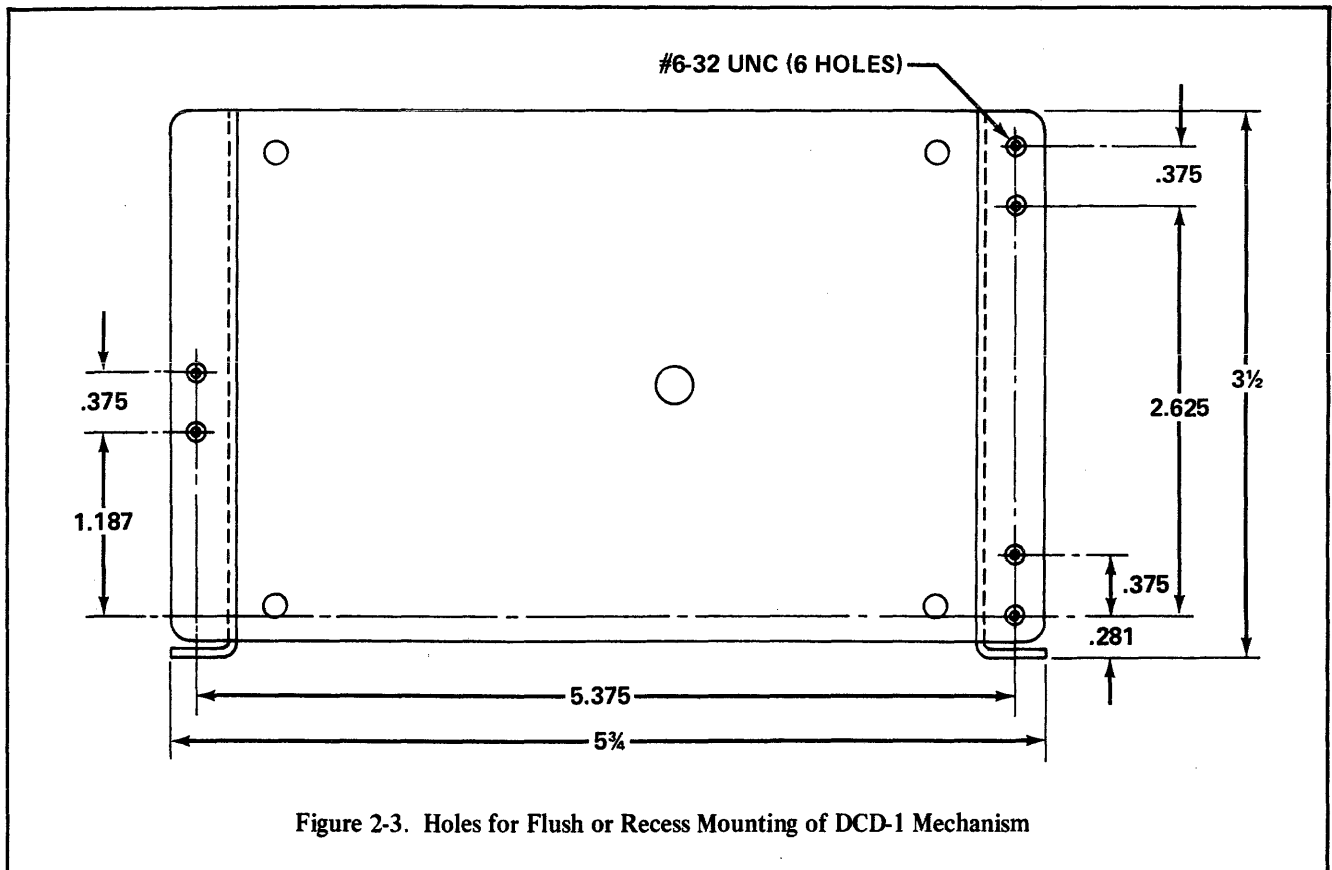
Holes for Flush or Recess Mounting of DCD-1 Mechanism
